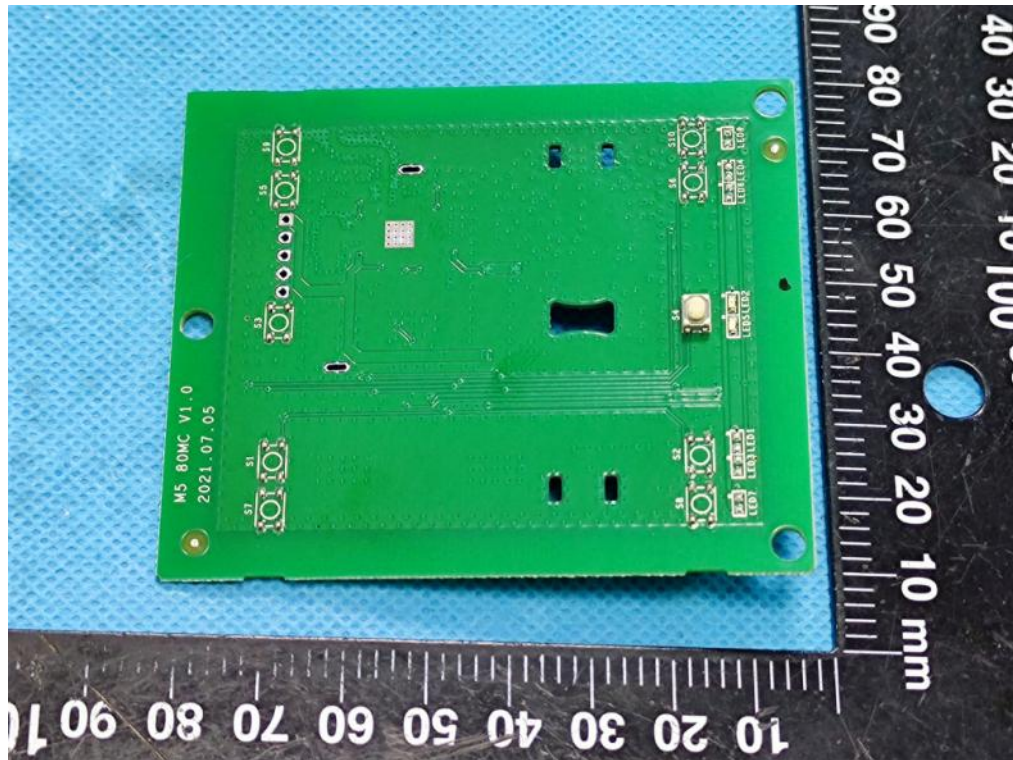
PCB bottom view of control board (Model: M5-1C-80)
